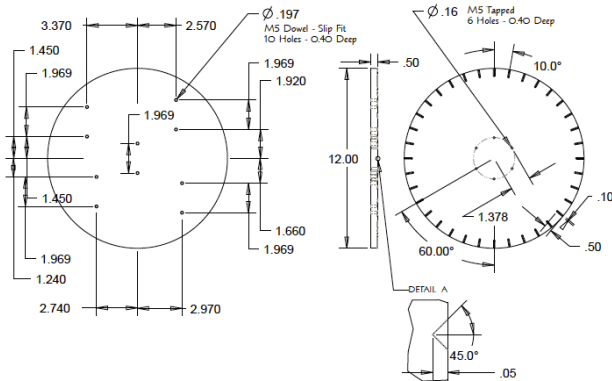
The base plate design of GT2011 featuring five mounting position (left) and 36 rotation presets (right).
